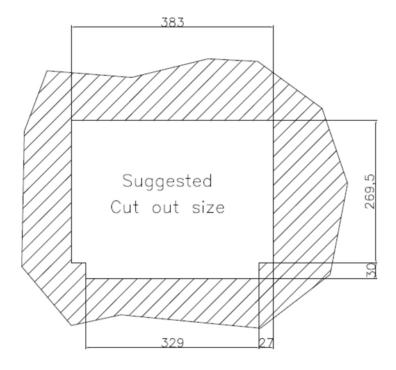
AFL-17B-915 Cutout Dimensions (units in mm)
